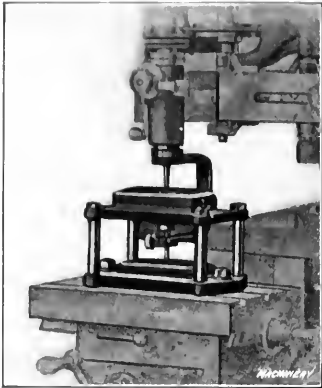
Attachment for Use in engraving on Convex or Concave Surfaces
